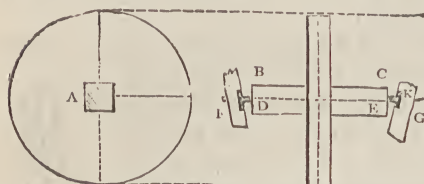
SIDE ELEVATION. FIG. 535. FRONT ELEVATION. WHEEL OF WHEELBARROW.
